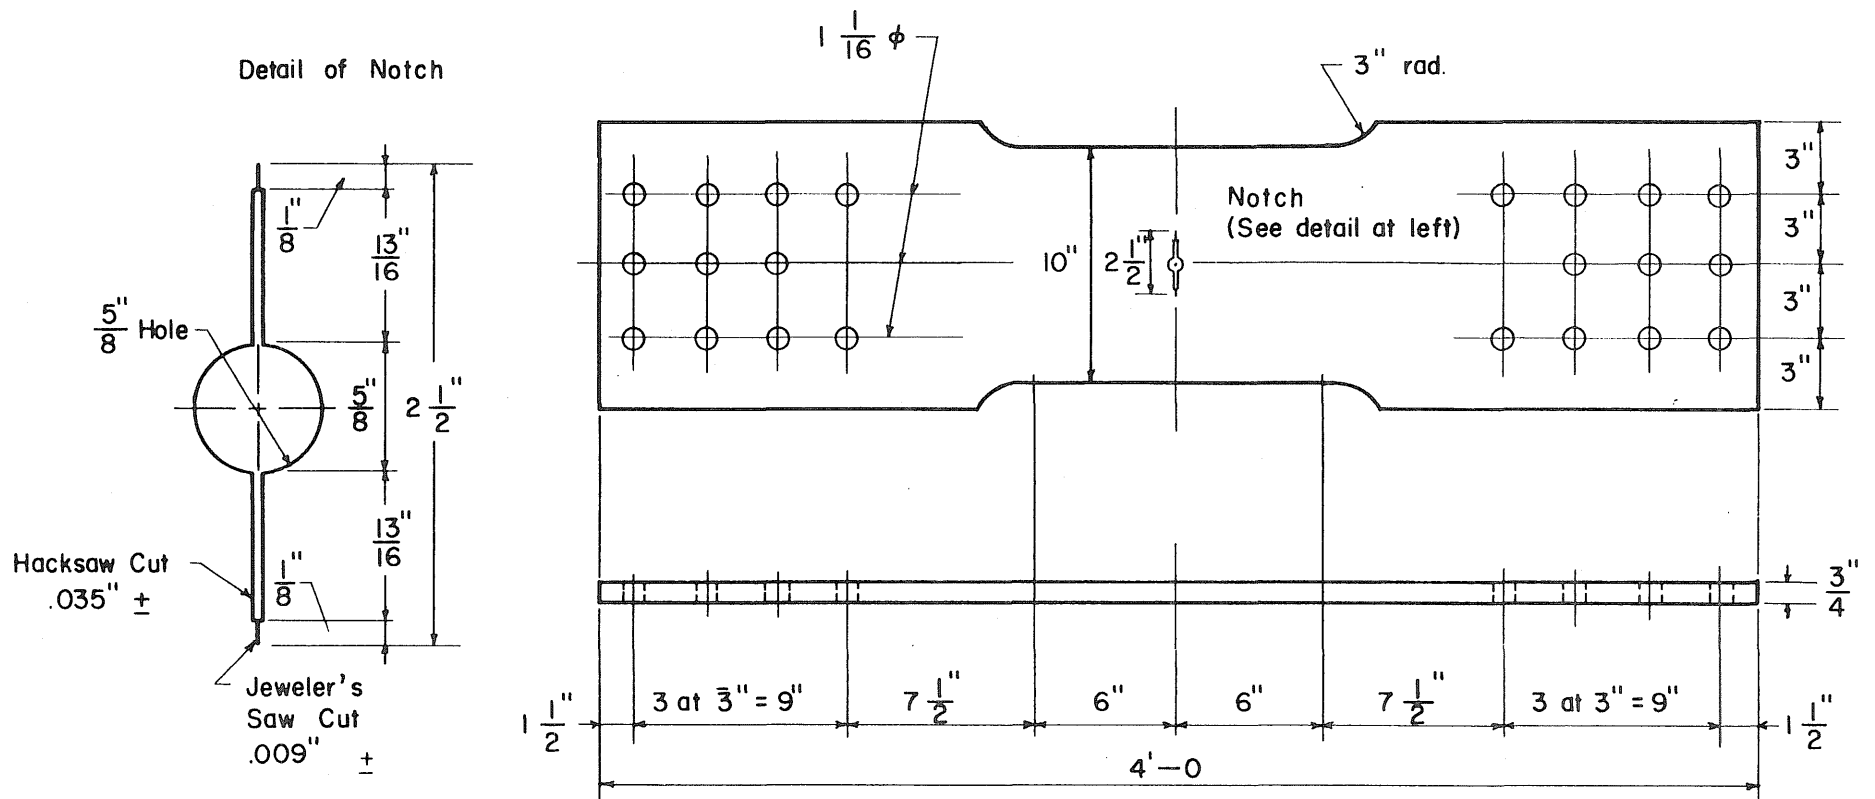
DETAILS OF PLAIN PLATE SPECIMENS OF RIMMED AND HY-80 STEELS
